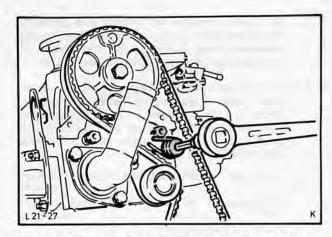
Slacken toothed belt tensioner using Special Tool 21-012
